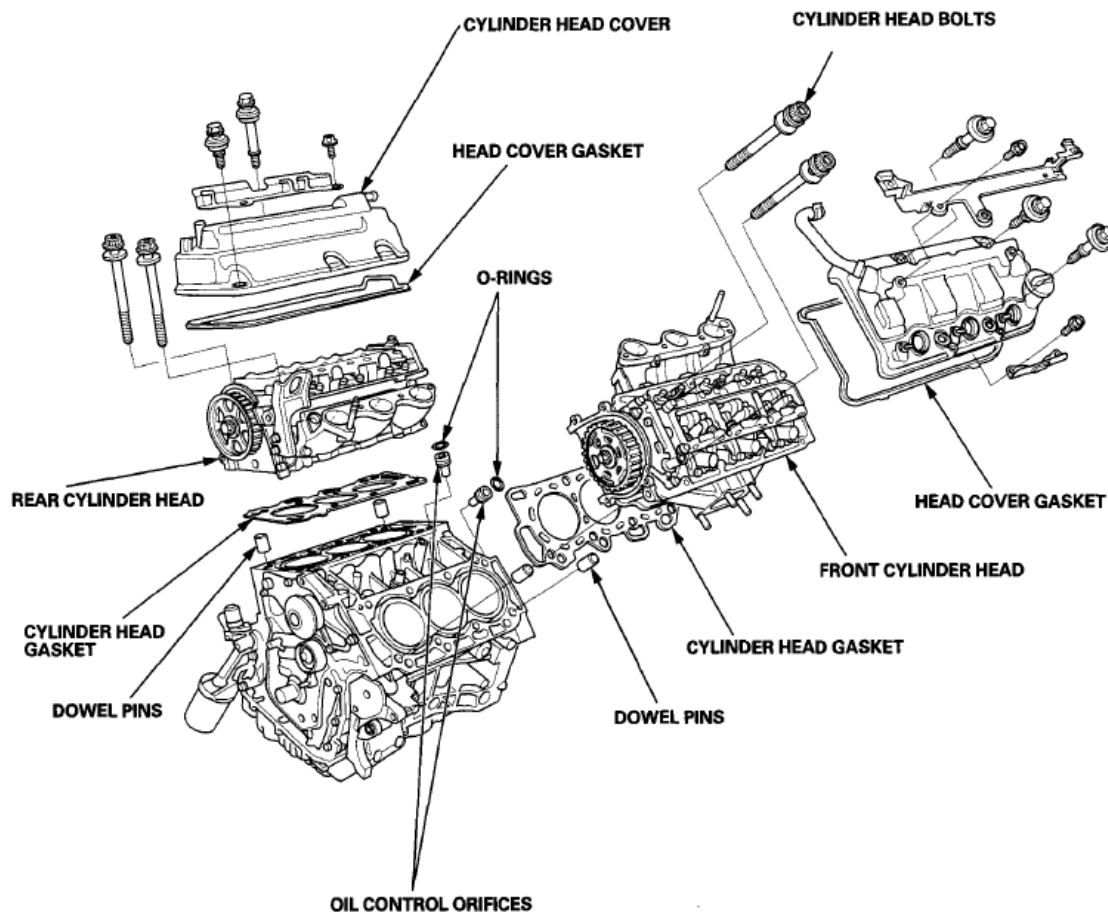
Exploded View Of Cylinder Head Replacement Components Location
